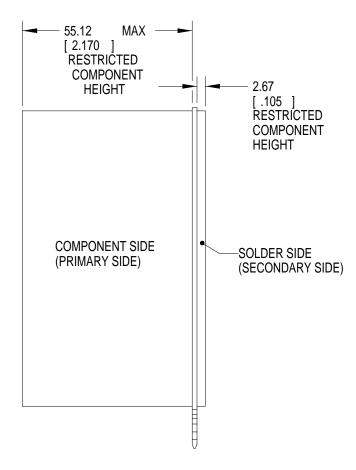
PCI Express 225 W Add-in Card Dimensional Drawing
